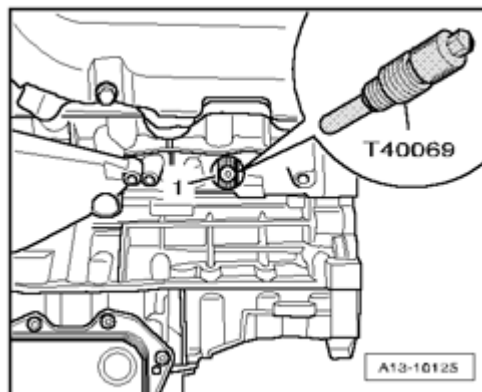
Installing Crankshaft Holder T40069 Into Hole
